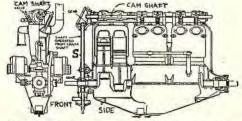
Wisconsin six-cylinder aviation engine which has a valve action quite similar to that used on the Stutz racing cars. The cam shaft is carried overhead.
